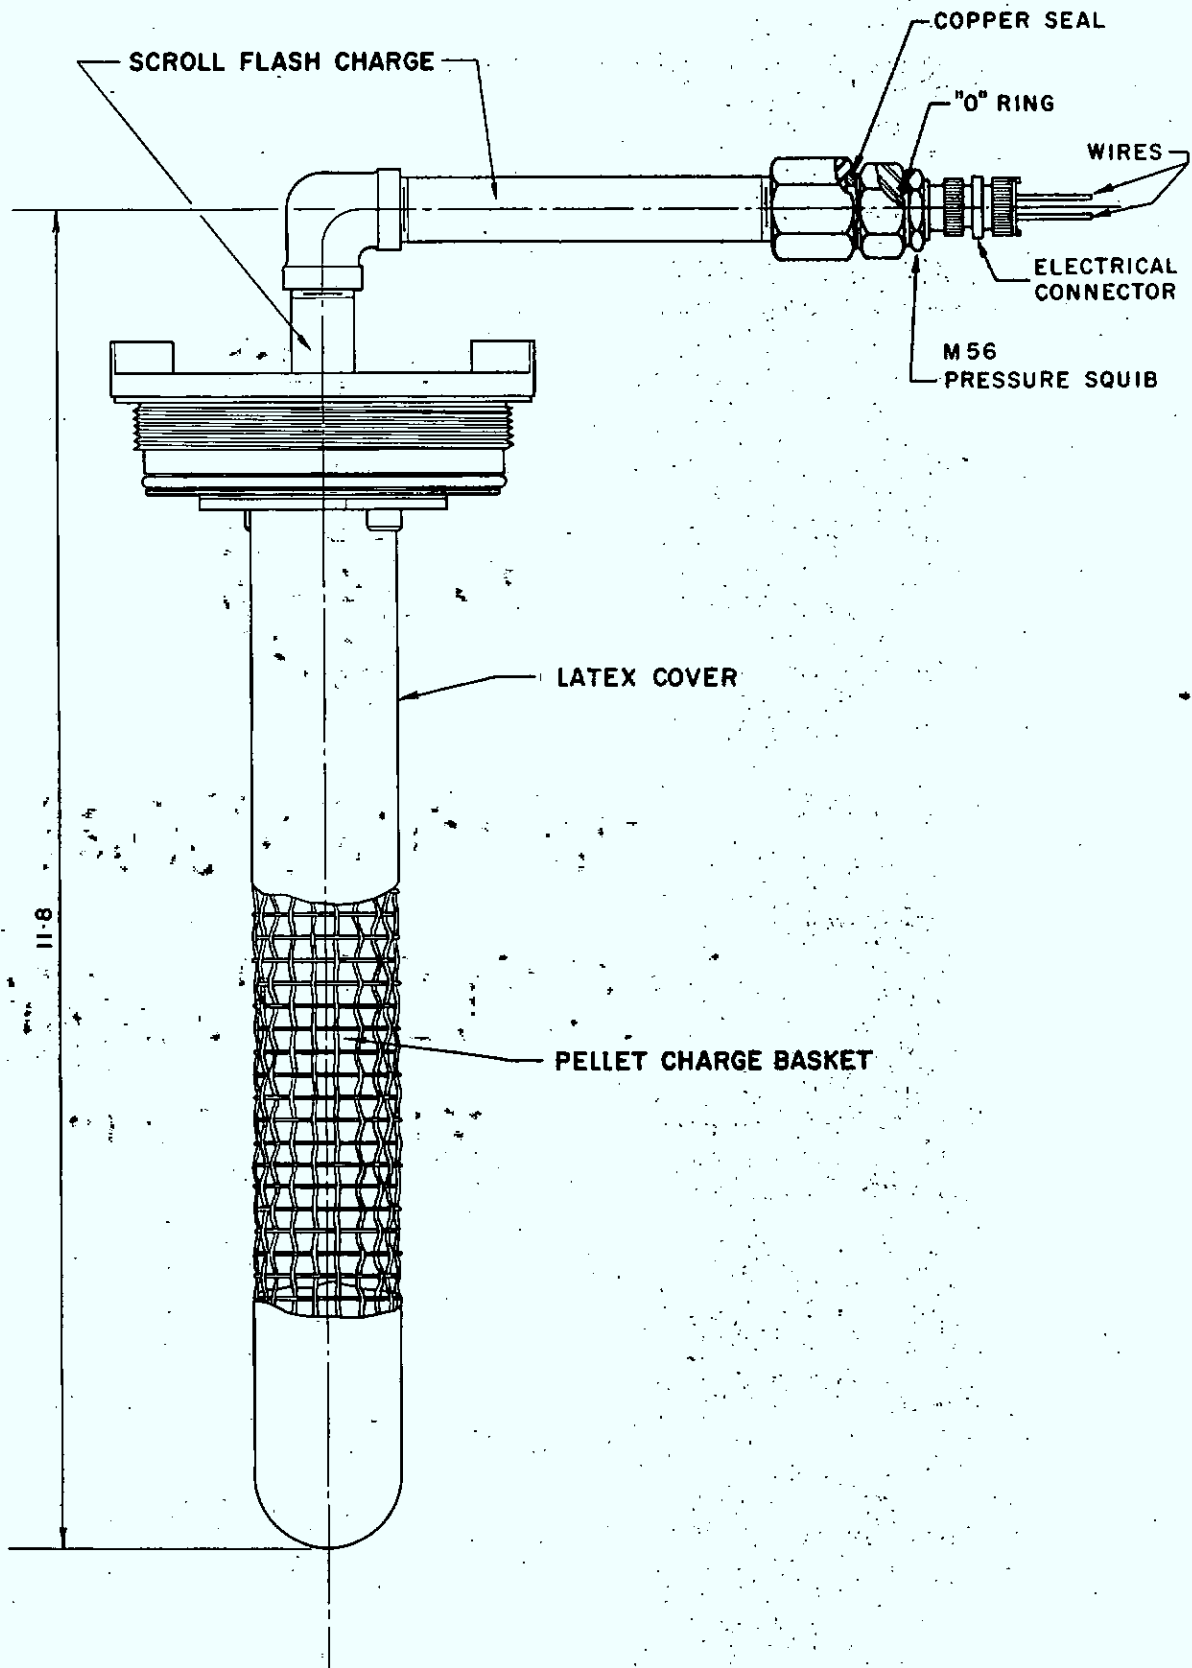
Schematic of 15KS25000 Rocket Motor Igniter
